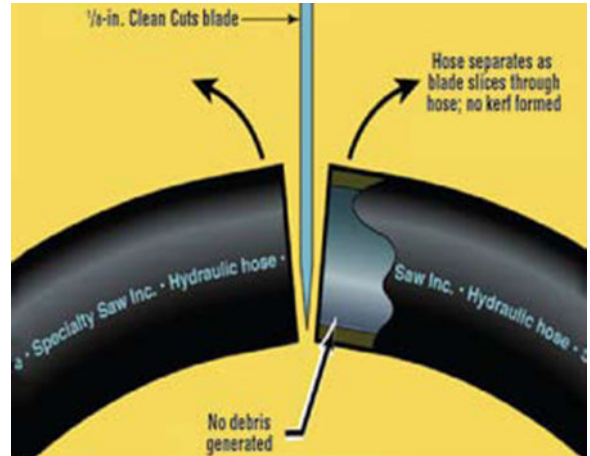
A: Hose sliced by knife blade (courtesy: hydraulicspneumatics.com)
